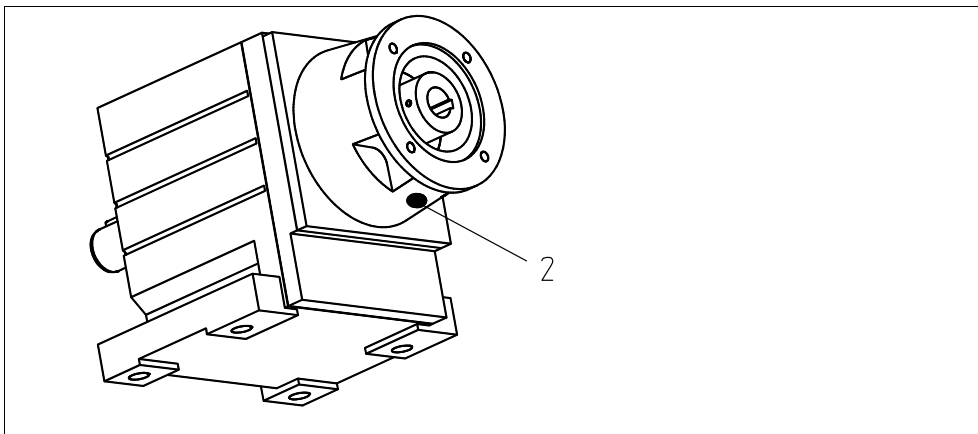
Standard motor flange; position of the check bore hole for leakages
